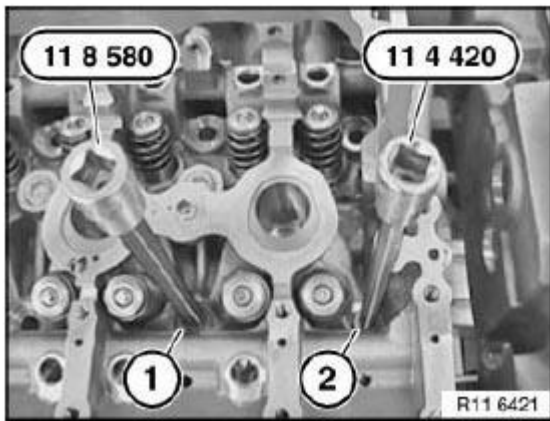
Identifying Special Tool (11 8 580 And 11 4 420)
